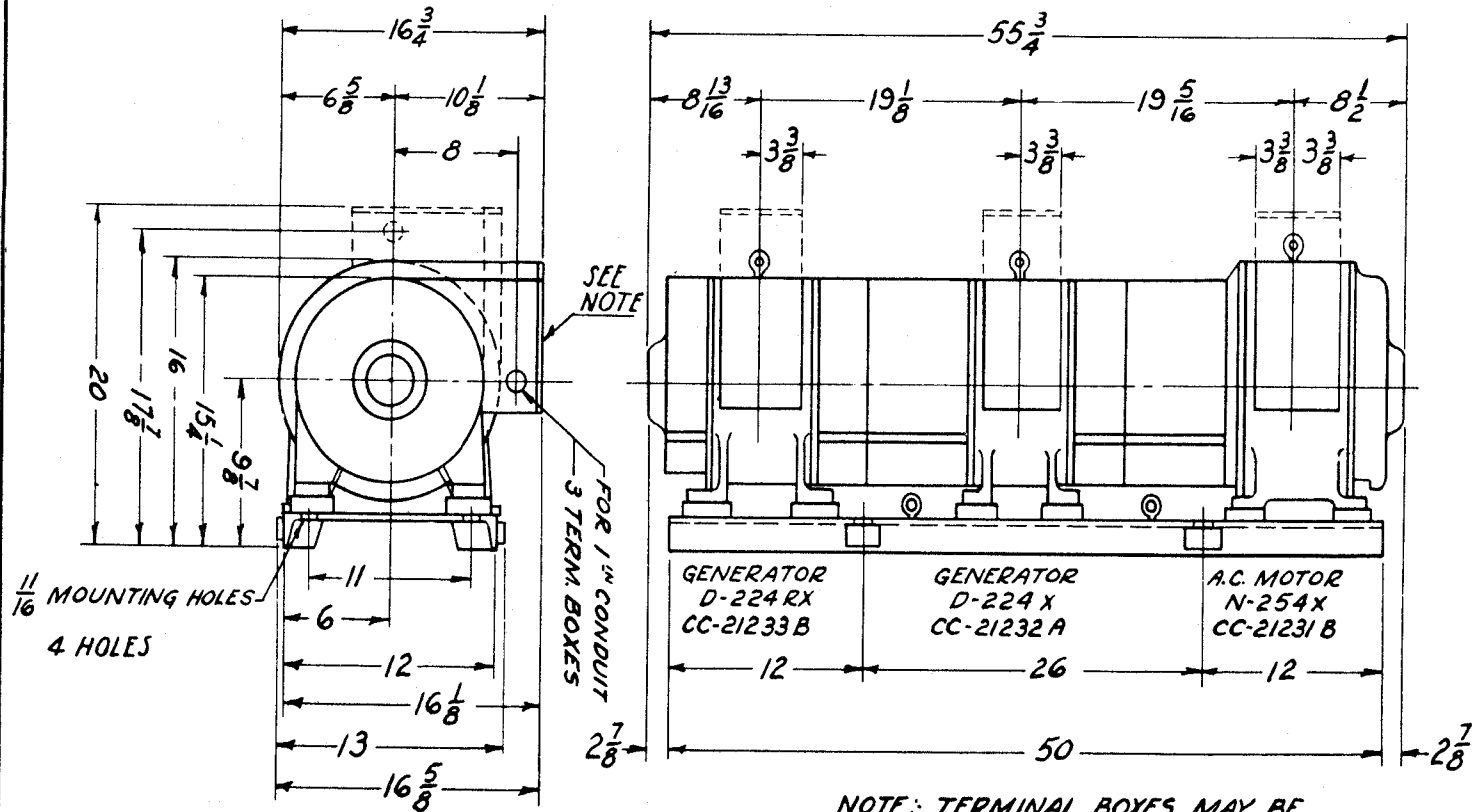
Motor-Generator Unit, TBL-6/7/12/13, Type CC-21426A, 115 V. D.C. and Type CC-21427A, 230 V. D.C. Operation. Outline Drawing (Dwg. 7408182)
